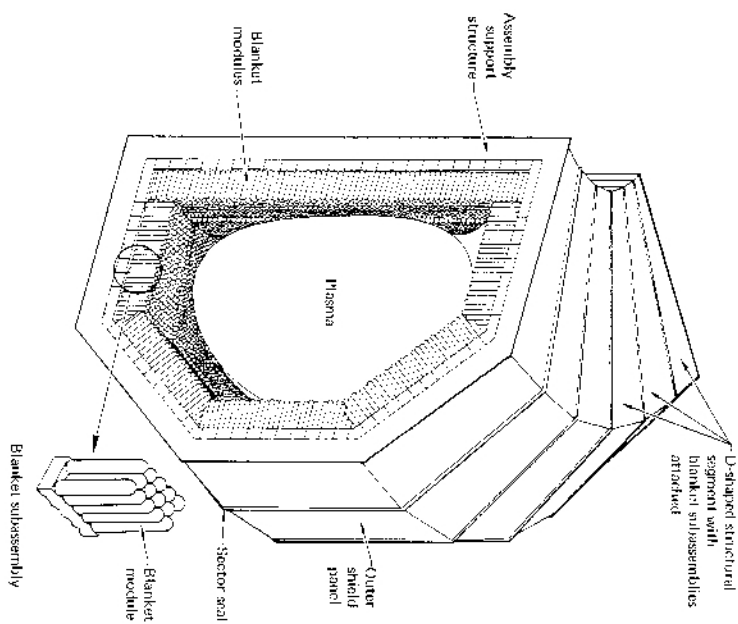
Pressure-cylinder blanket assembly in toroidal geometry.
